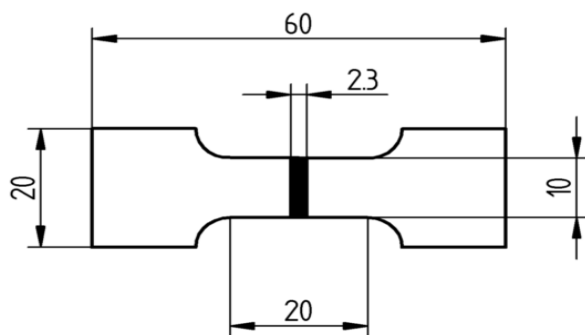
Dimensions (mm) of tensile test samples for ultrasonic welding
